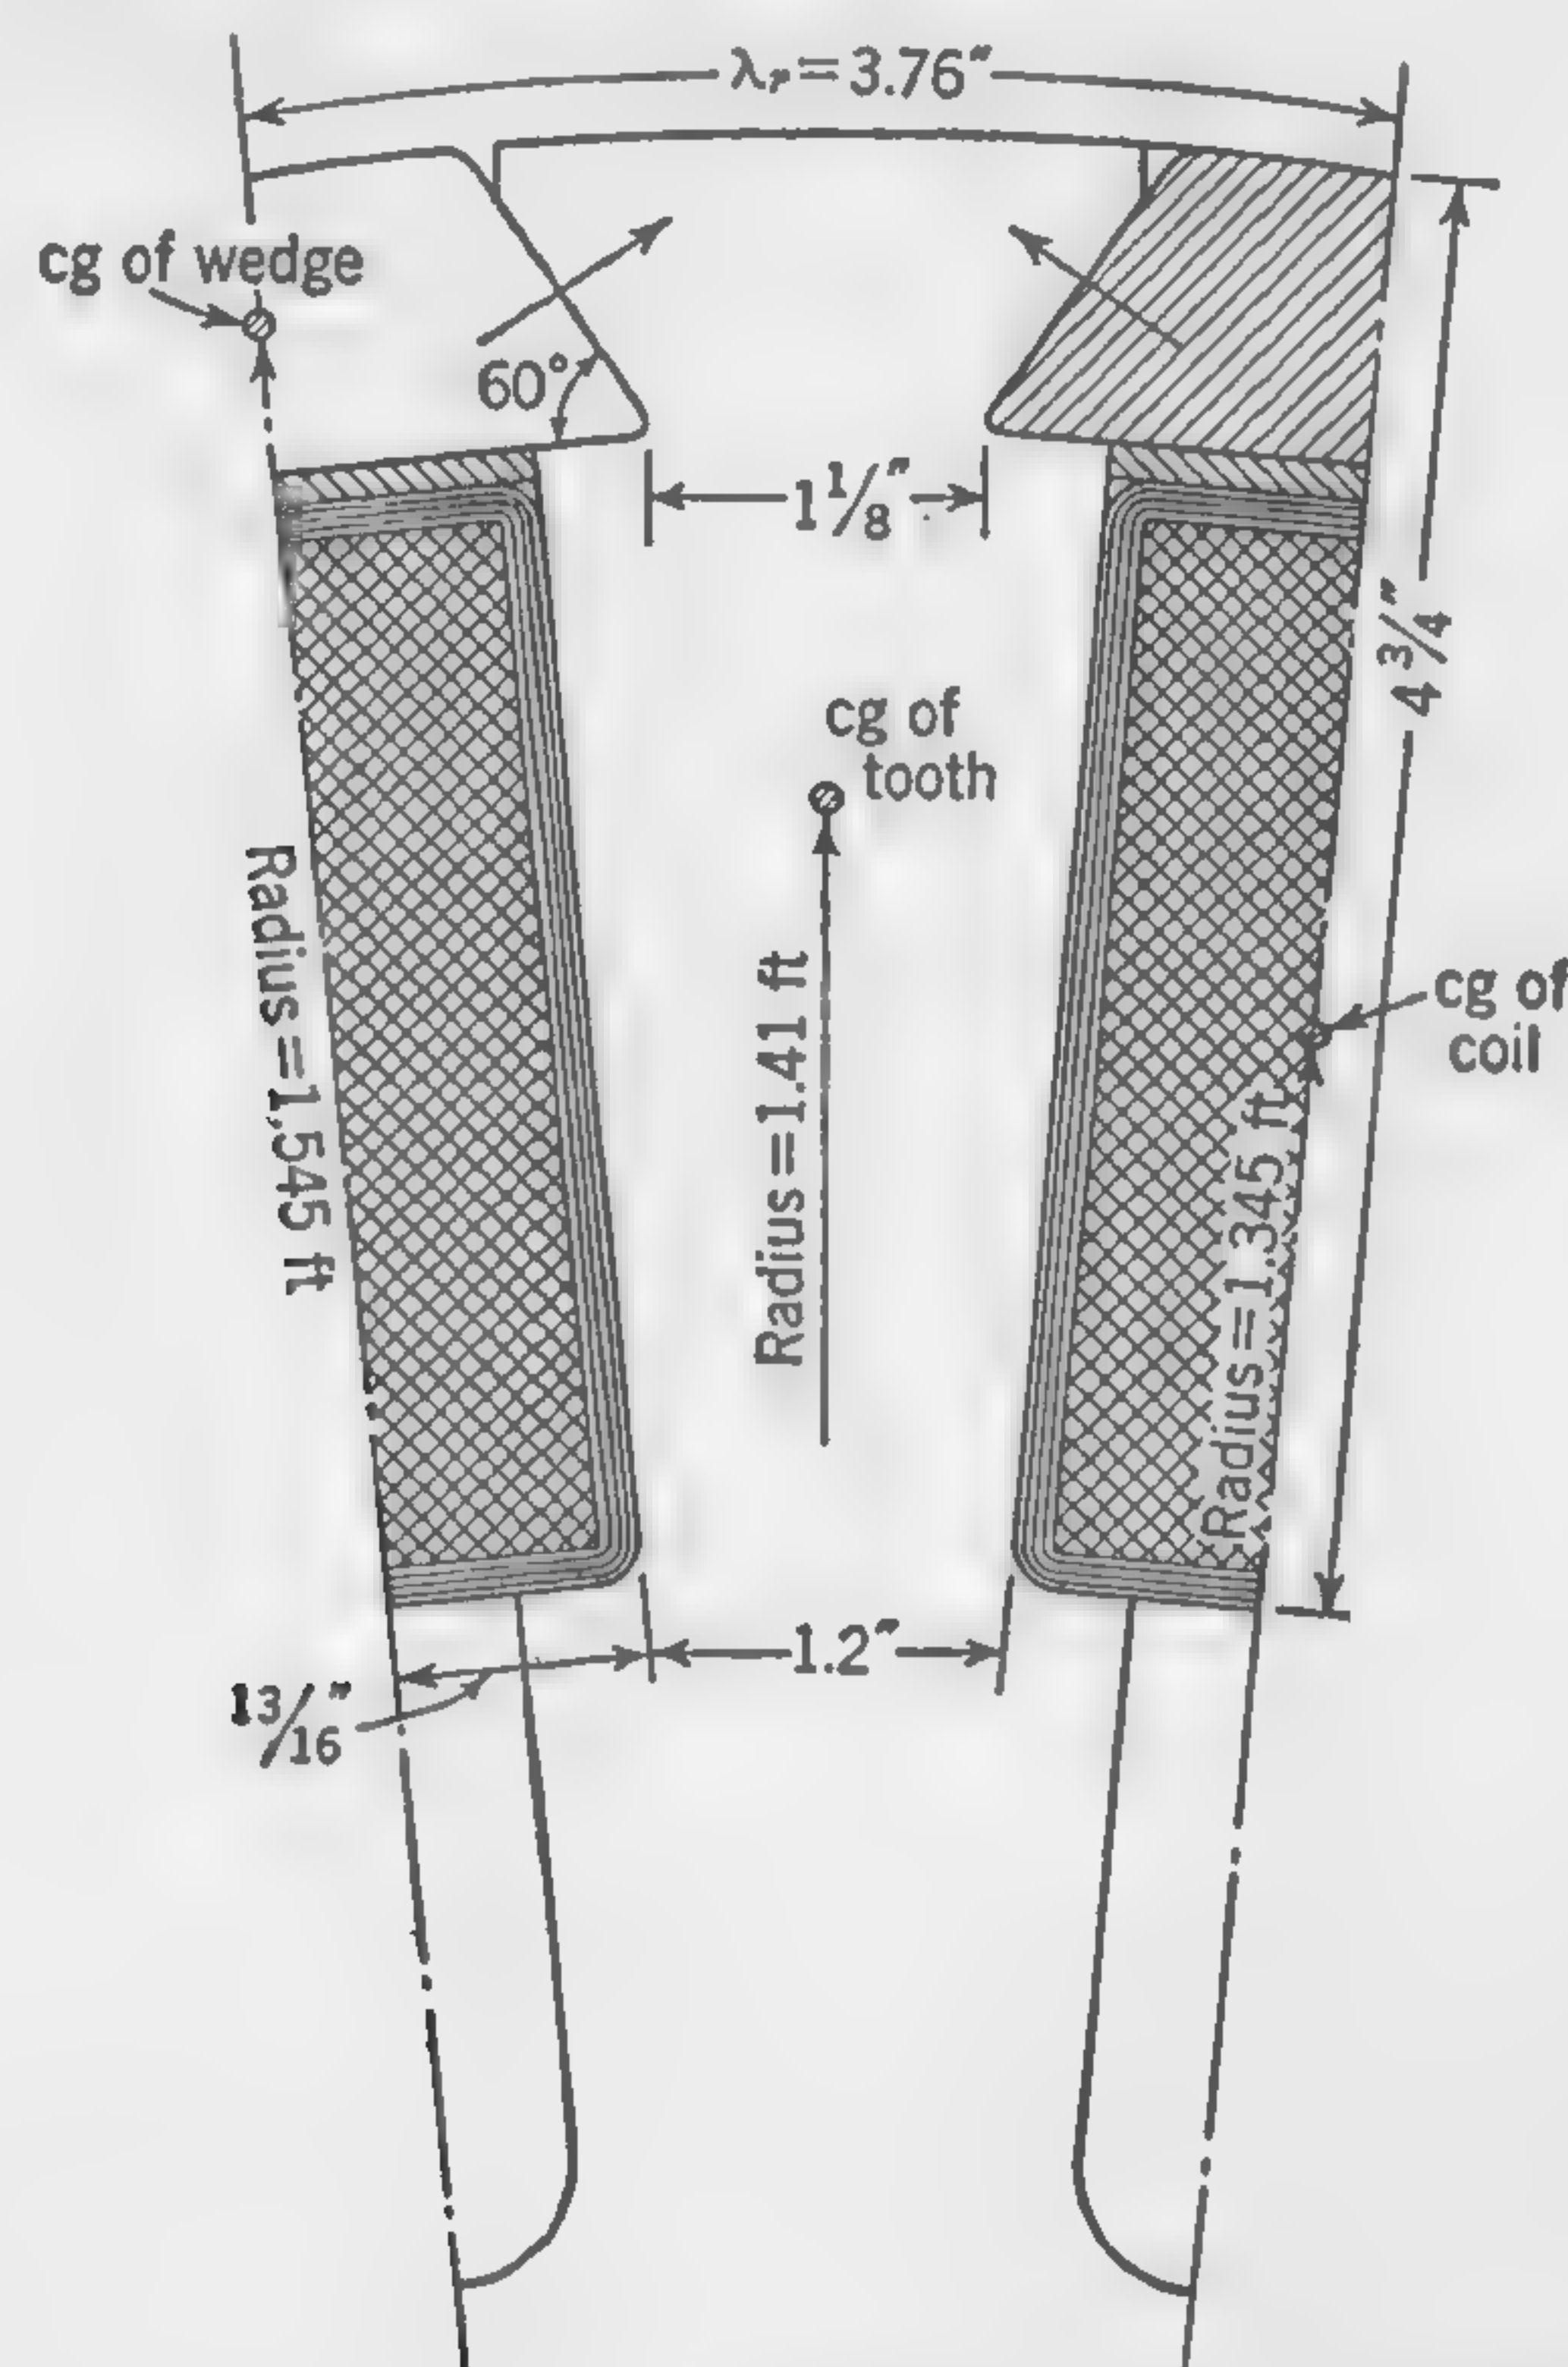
Rotor tooth of turbo-alternator designed in Illustrative Example of Art. 91.
